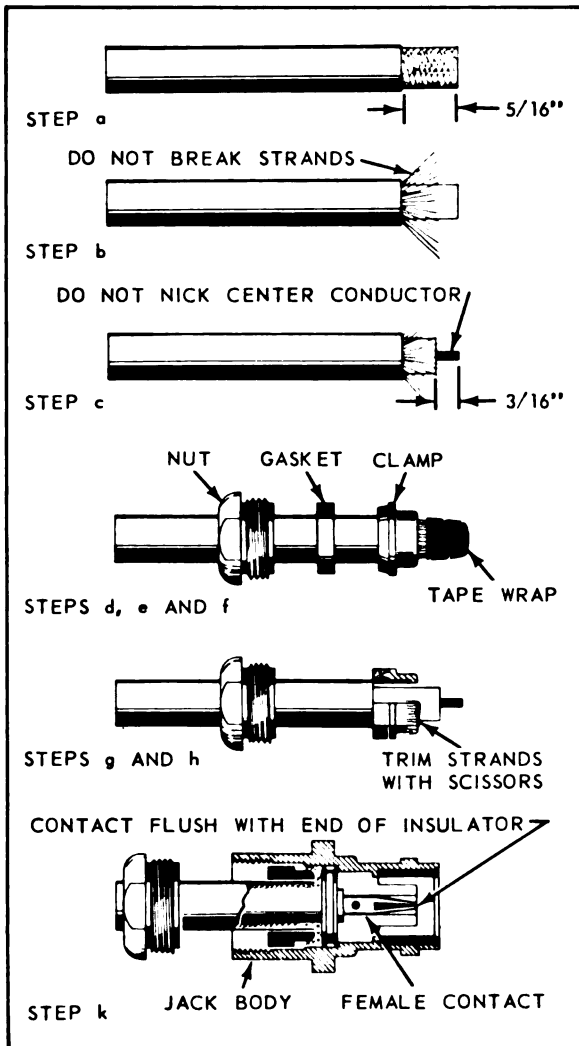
Attaching Improved BNC Connectors to Coaxial Cable
